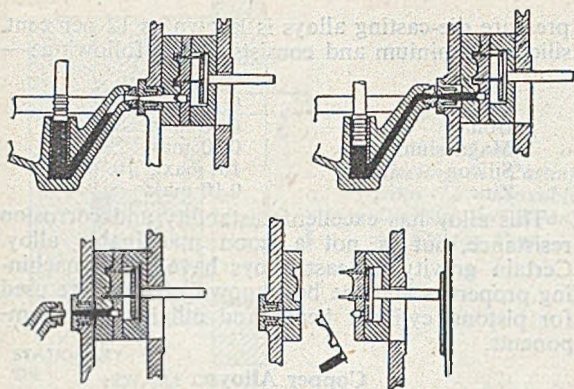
Stages in Production from a Die-casting Machine utilising a Vertical Plunger.
